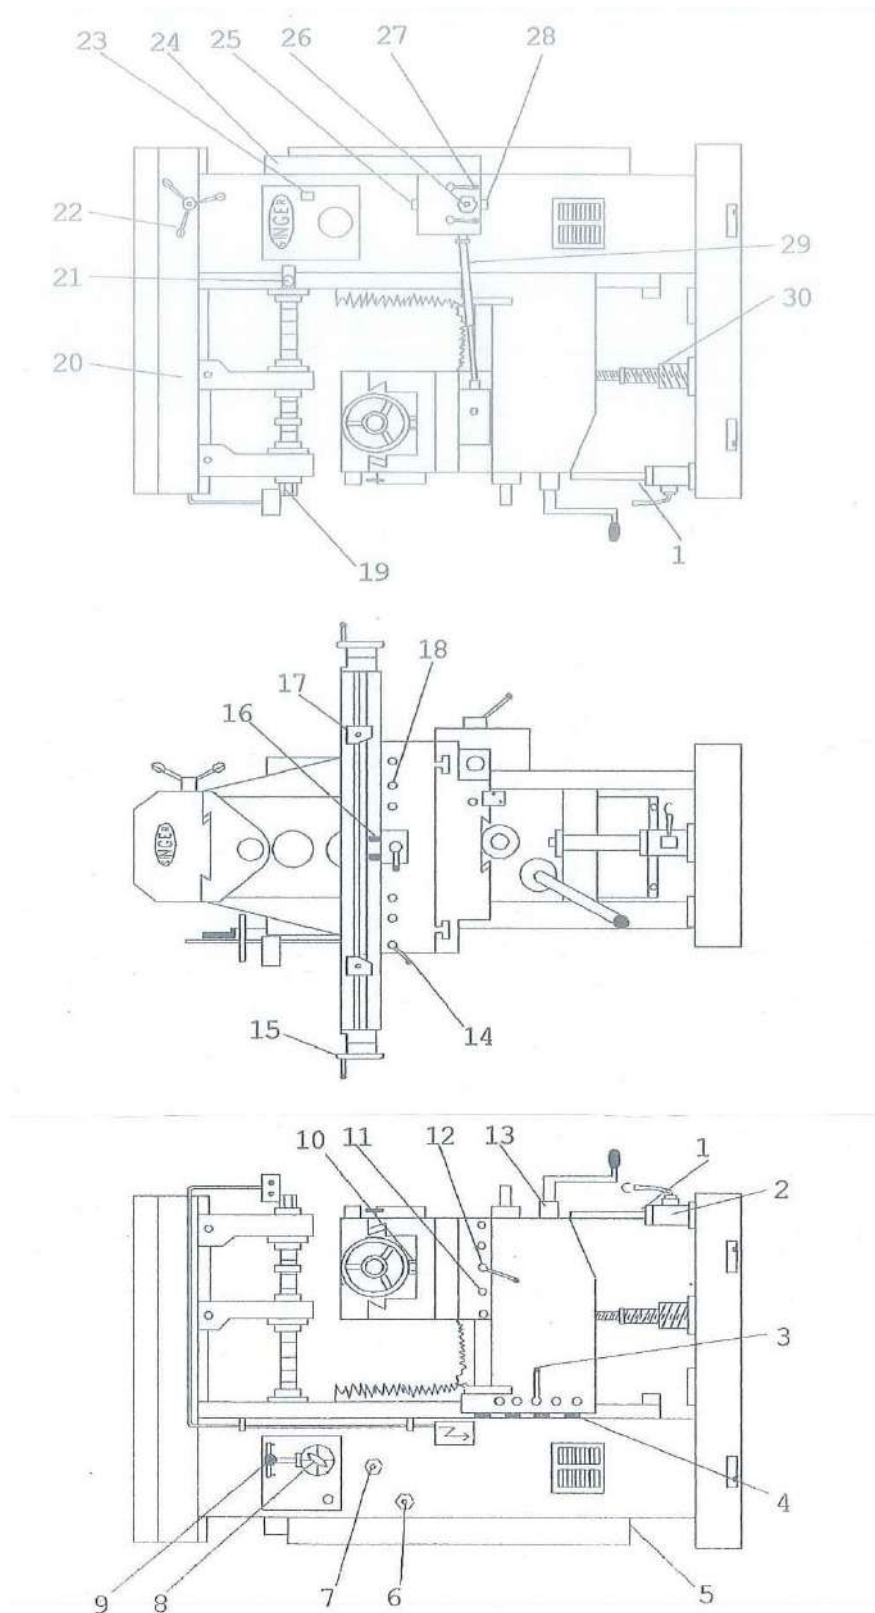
GENERAL VIEW SHOWING LUBRICATION POINTS
